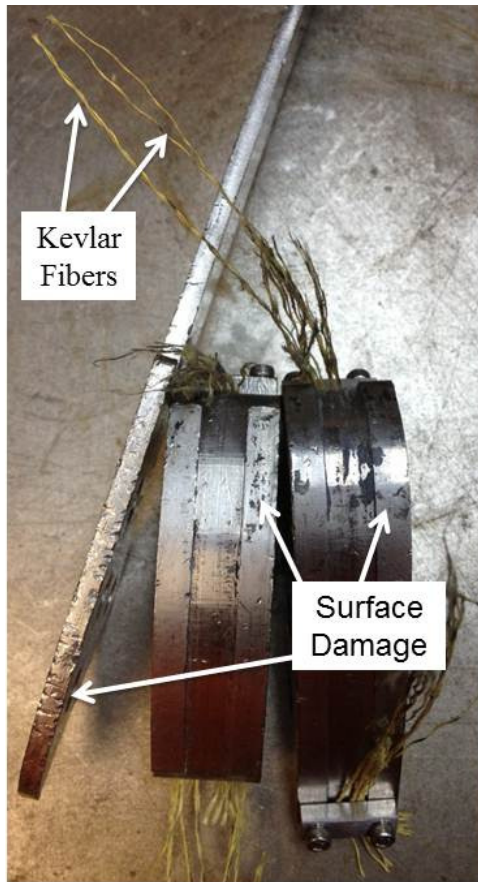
Damage to joint surfaces caused by loosening of the six bolts.
